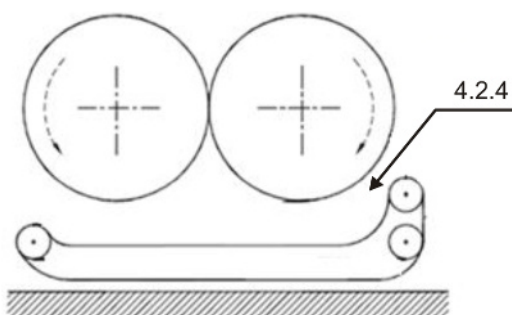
Location of mechanical hazards on a two-roll mill with a recovery conveyor belt
